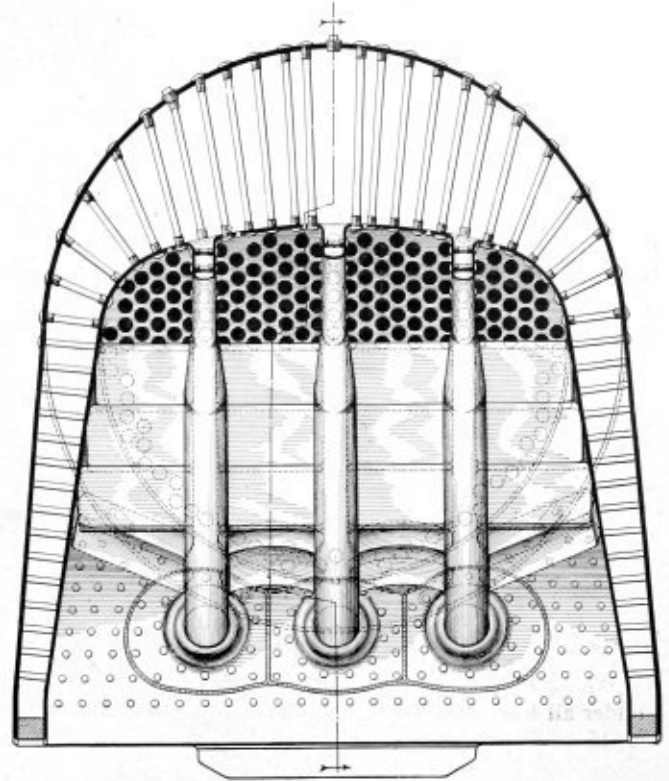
Typical Three Syphon Installation, Showing Arrangement of Arch in a Wide Firebox
